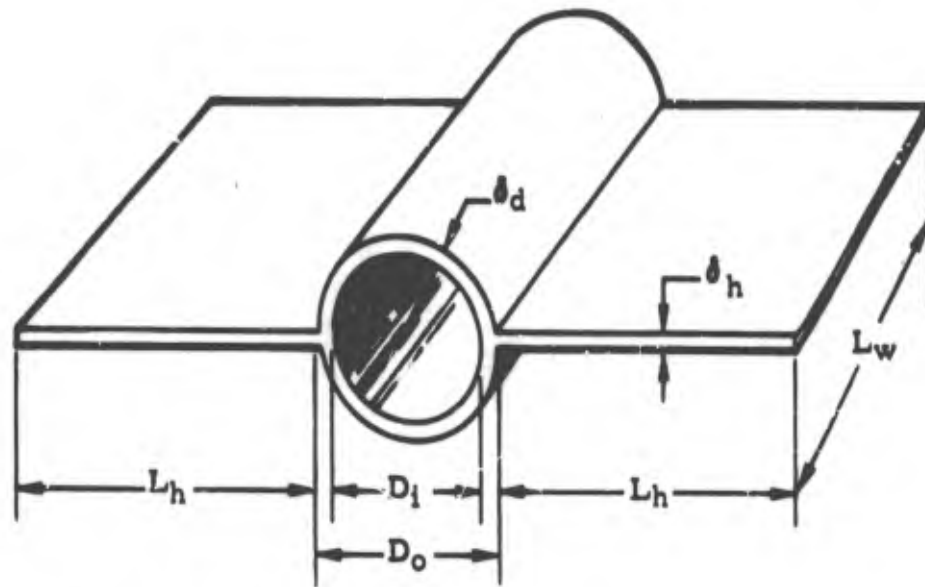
Dimensional Relationships of Cylindrical-Tube Condenser With Extended Surfaces of Constant Thickness
